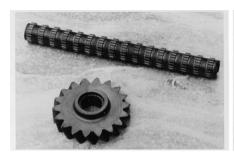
Broaching tools for finishing internal toothed centre gears (Source: Forst)
